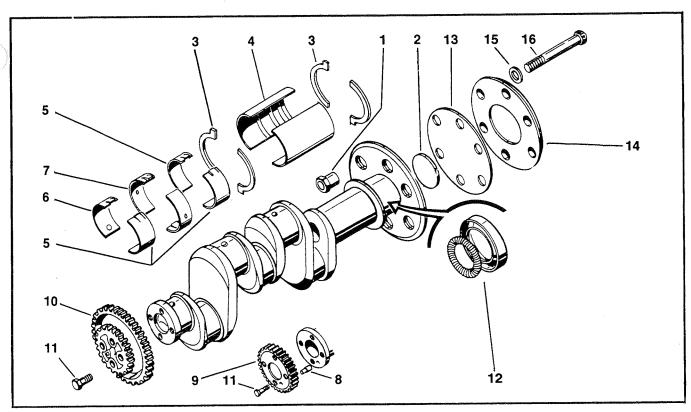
CRANKSHAFT ASSEMBLY - FLANGED.
